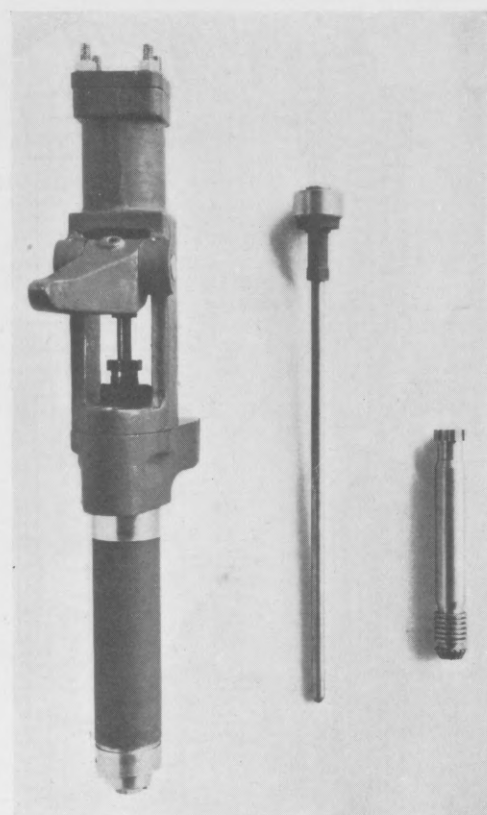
Fuel injector showing needle valve and atomizer, which works with compressed air
